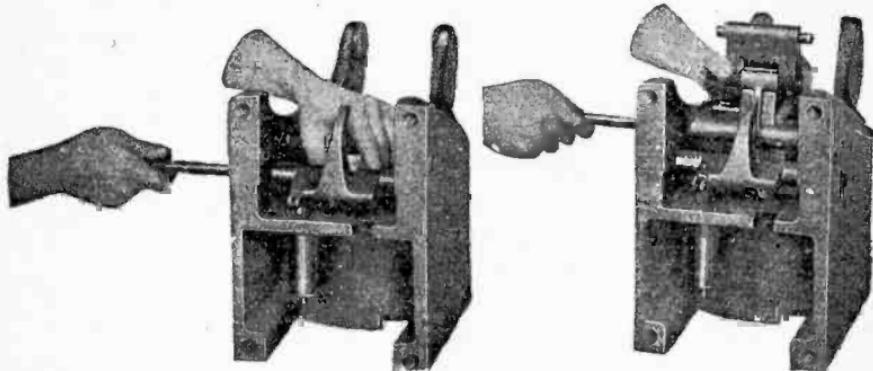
,156.—*How to assemble an air circuit breaker 11. Attaching tripping lever to solenoid mechanism.
